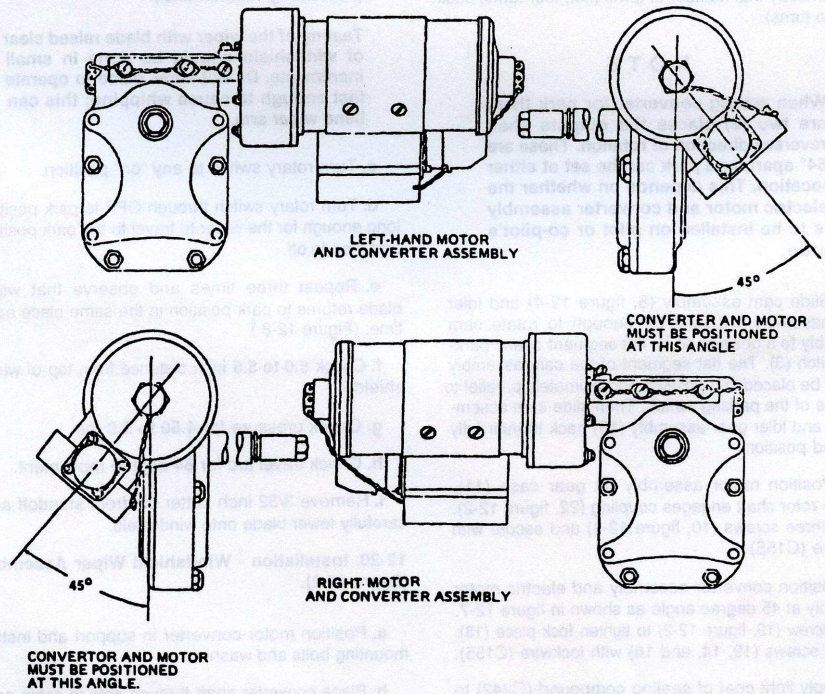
Motor and Converter Assembly — Left & Right Configuration
